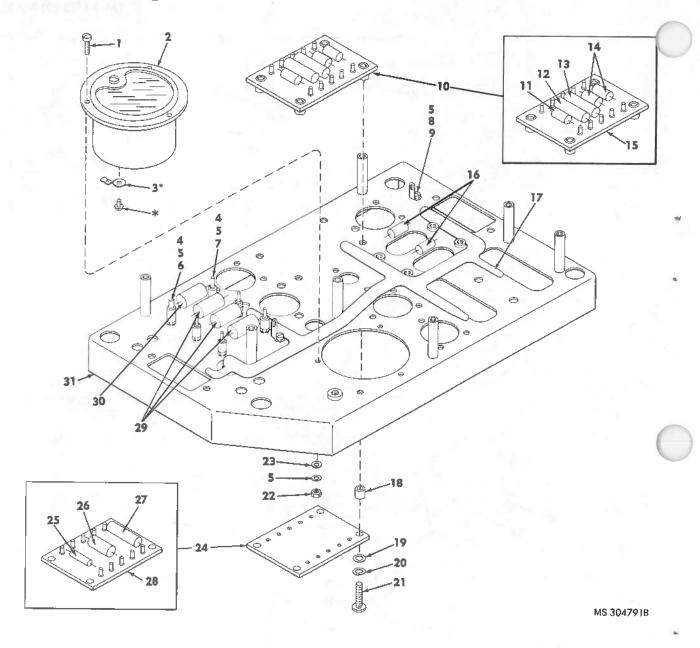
CONTROL. INDICATOR /1 G668227/-PARTIAL EXPLODED VIEW
